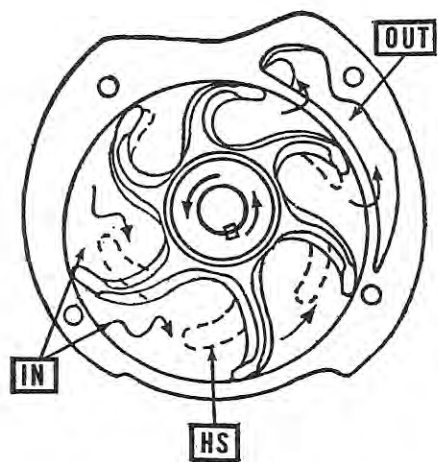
Schematic view of the rubber impeller type water pump used. Impeller mounts on lower unit drive shaft and rotates in offset pump housing. Water is drawn into pump (IN) as area between blades increases, and is forced into power head (OUT) as area narrows. At high speeds, blades remain curved as shown by broken lines (HS) and pump operates by centrifugal action.
